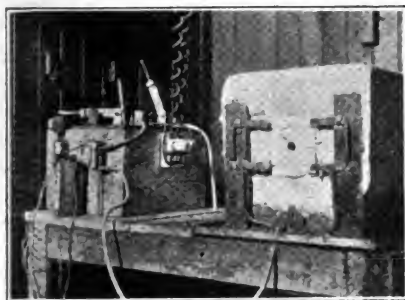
COMPLETE INSTALLATION—TRANSFORMER AND FURNACE
